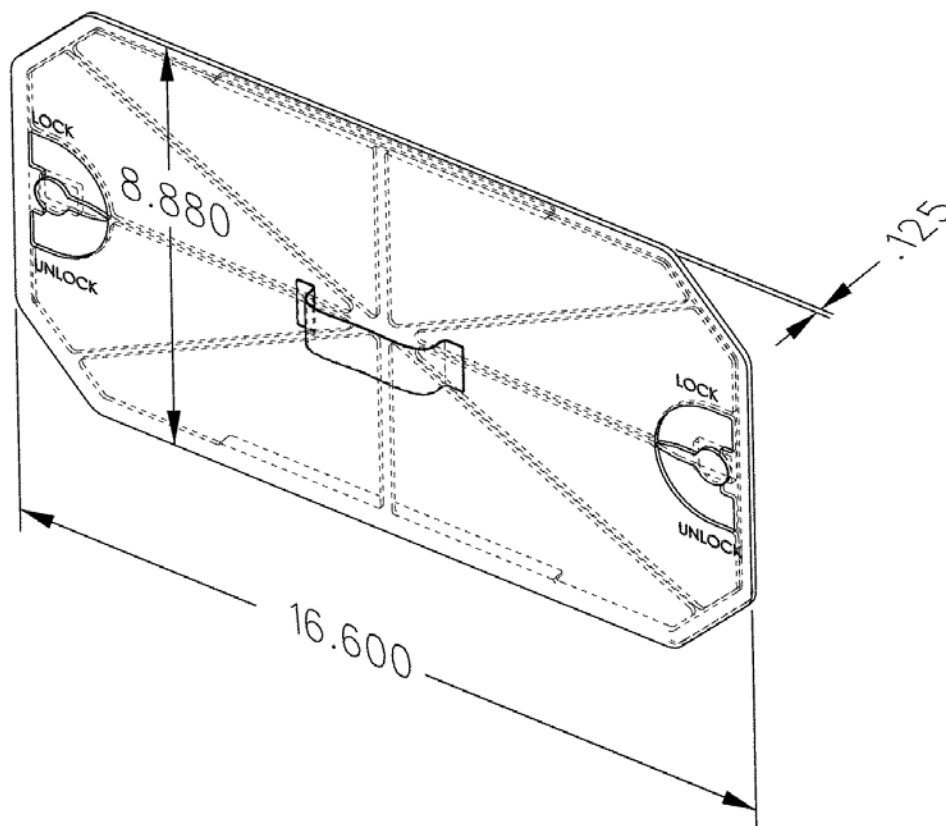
ISS SINGLE LOCKER REAR PLATE ASSEMBLY (PAGE 1 OF 2)
